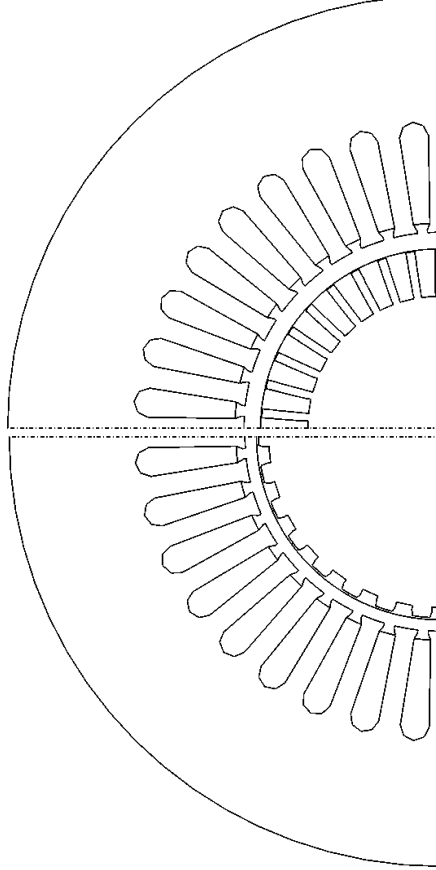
Initial (left) and optimized (right) designs of the cage C rotor.
